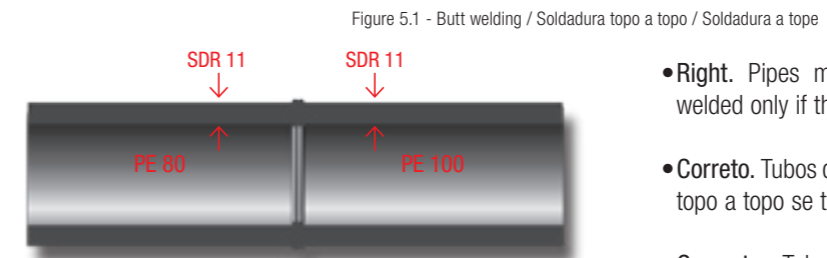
Butt welding / Soldadura topo a topo / Soldadura a tope
